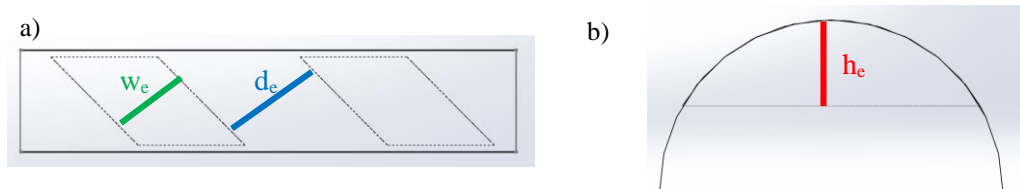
Schematic view of slanted rips elements. a) Top view and b) Front view.
